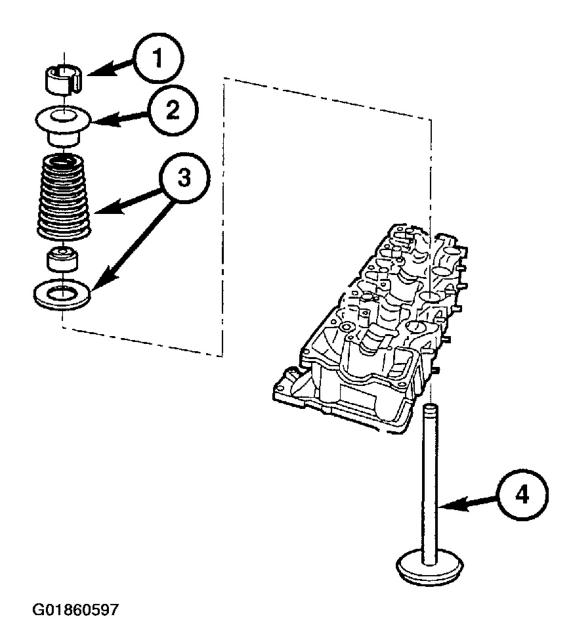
Pressing Valve Stem Seal & Installing Valve Stem
